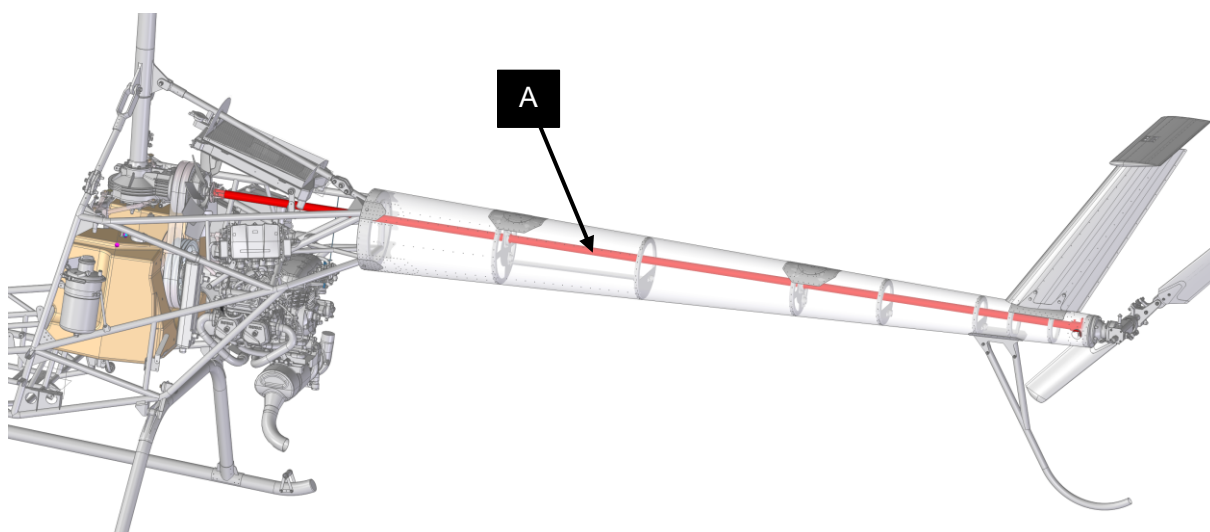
Tail rotor drive shaft representation in the overall helicopter assembly.
